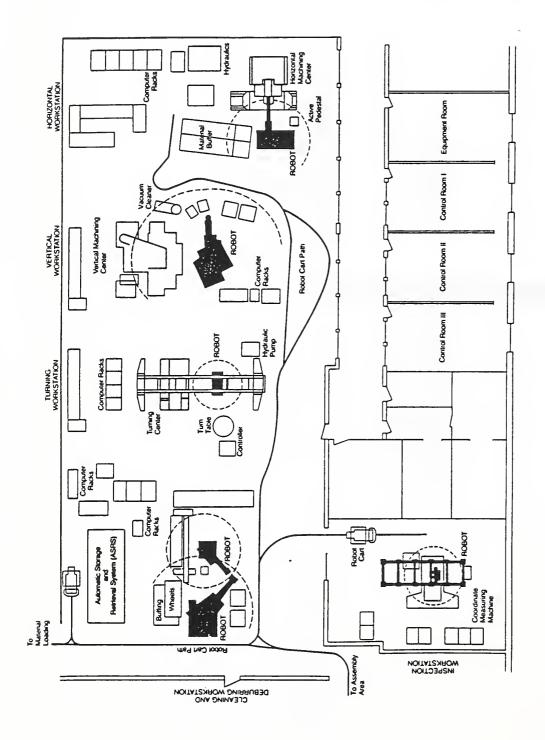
AMRF SHOP FLOOR LAYOUT
